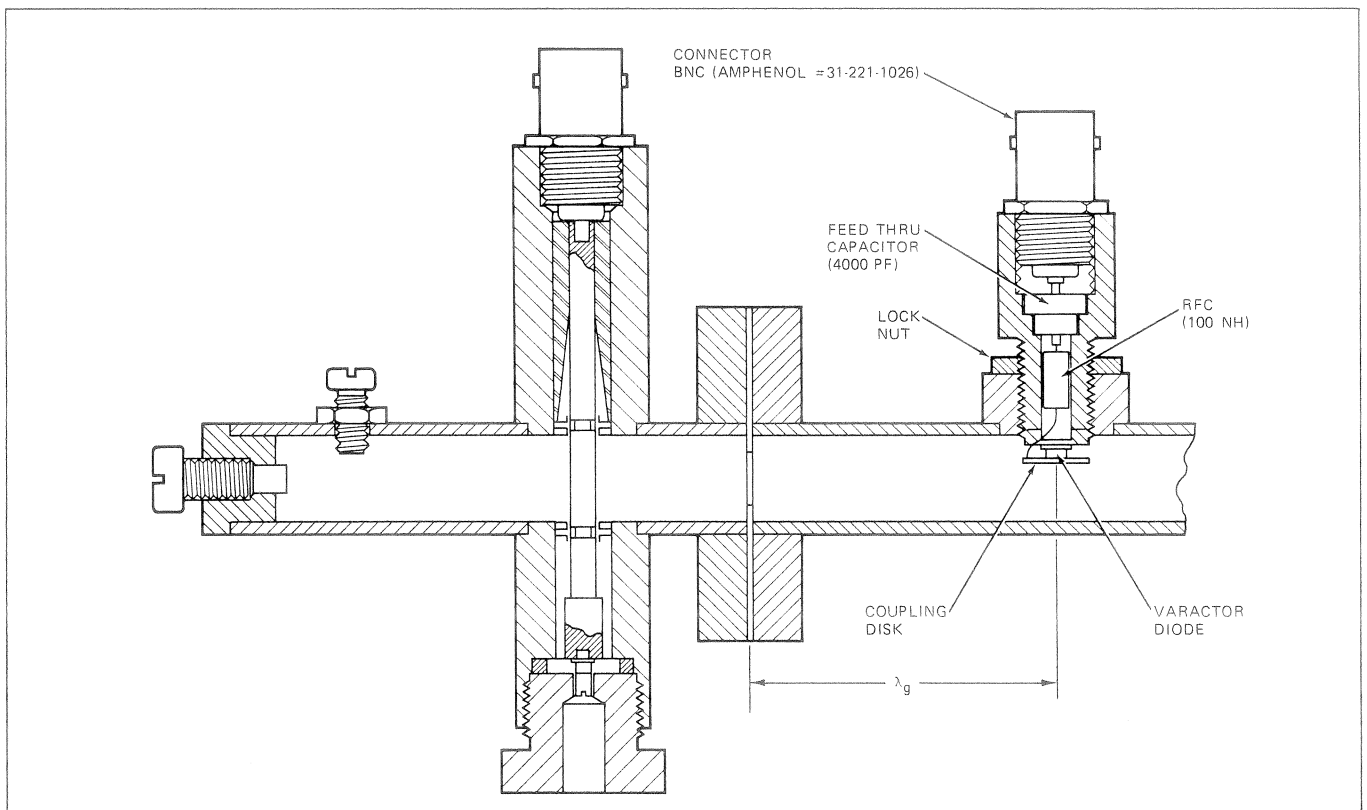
Varactor Diode Mounting Technique for the Coupled Coax-Waveguide Oscillator.
